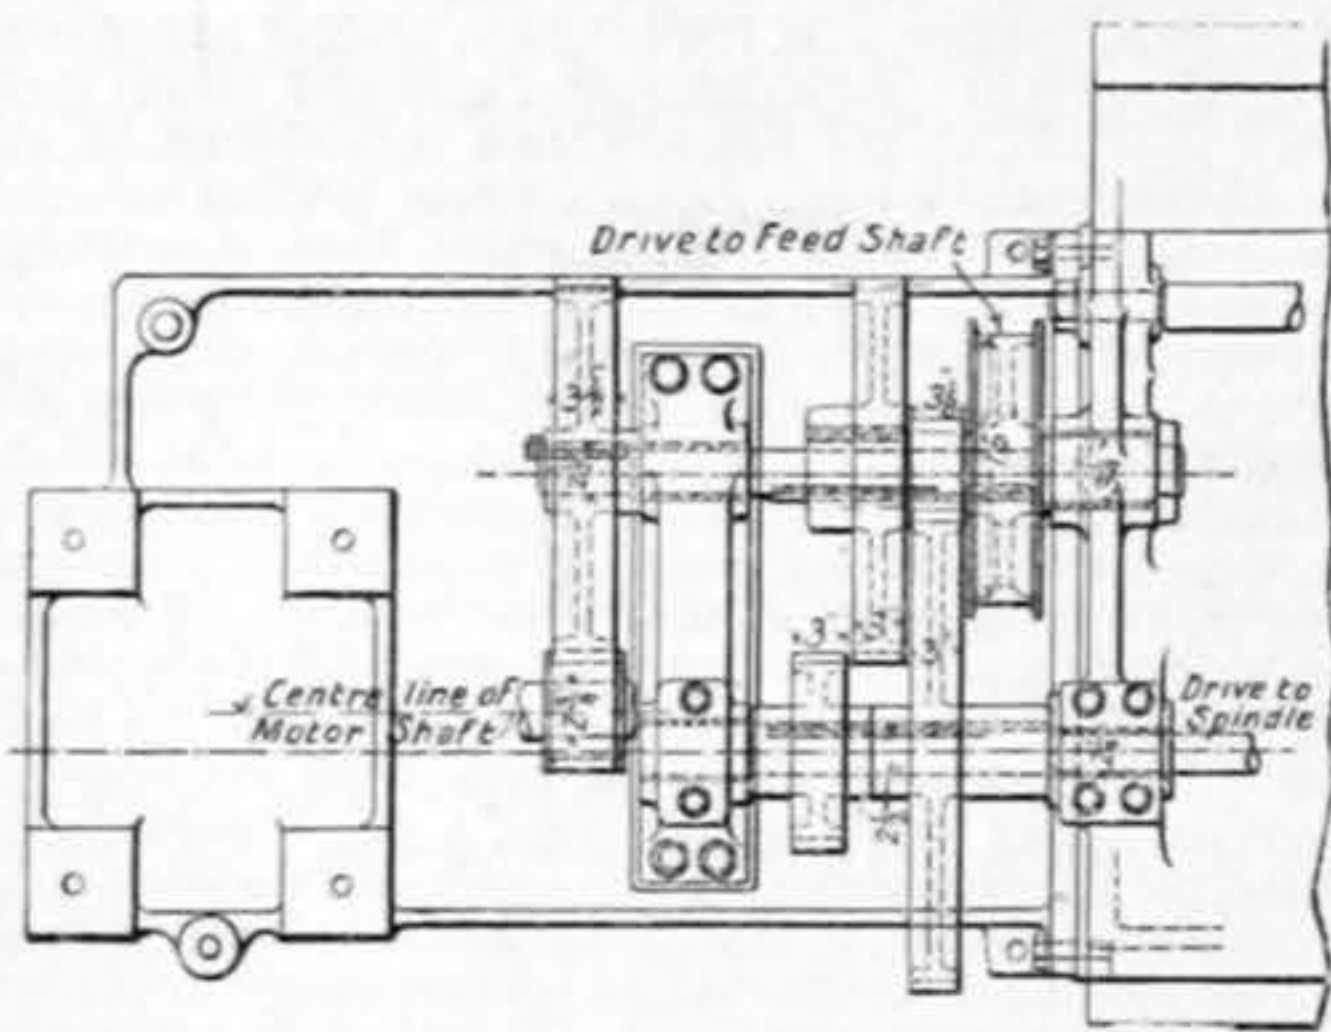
DETAILS OF THE ELECTRIC DRIVE
